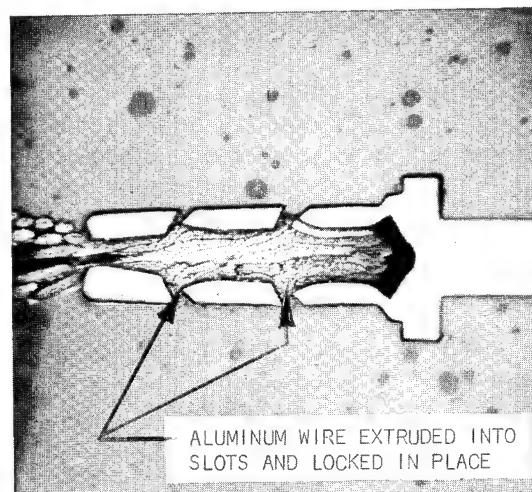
CROSS SECTION OF MULTIPLE SLOTTED CRIMPED PIN
